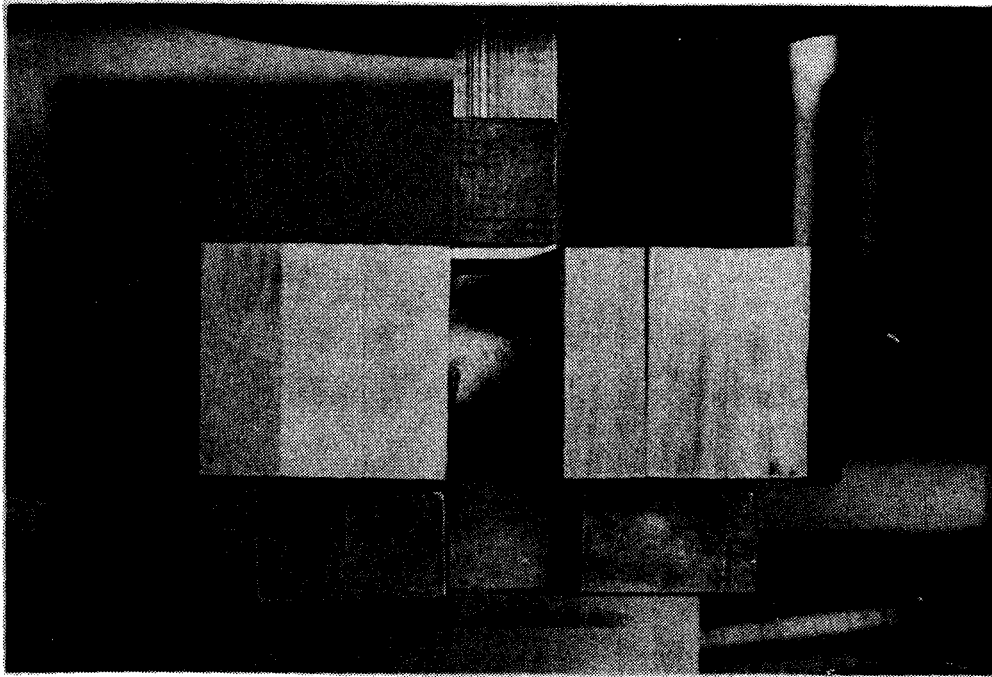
Typical 2x3 Stack Test Being Assembled In LN₂ Box
